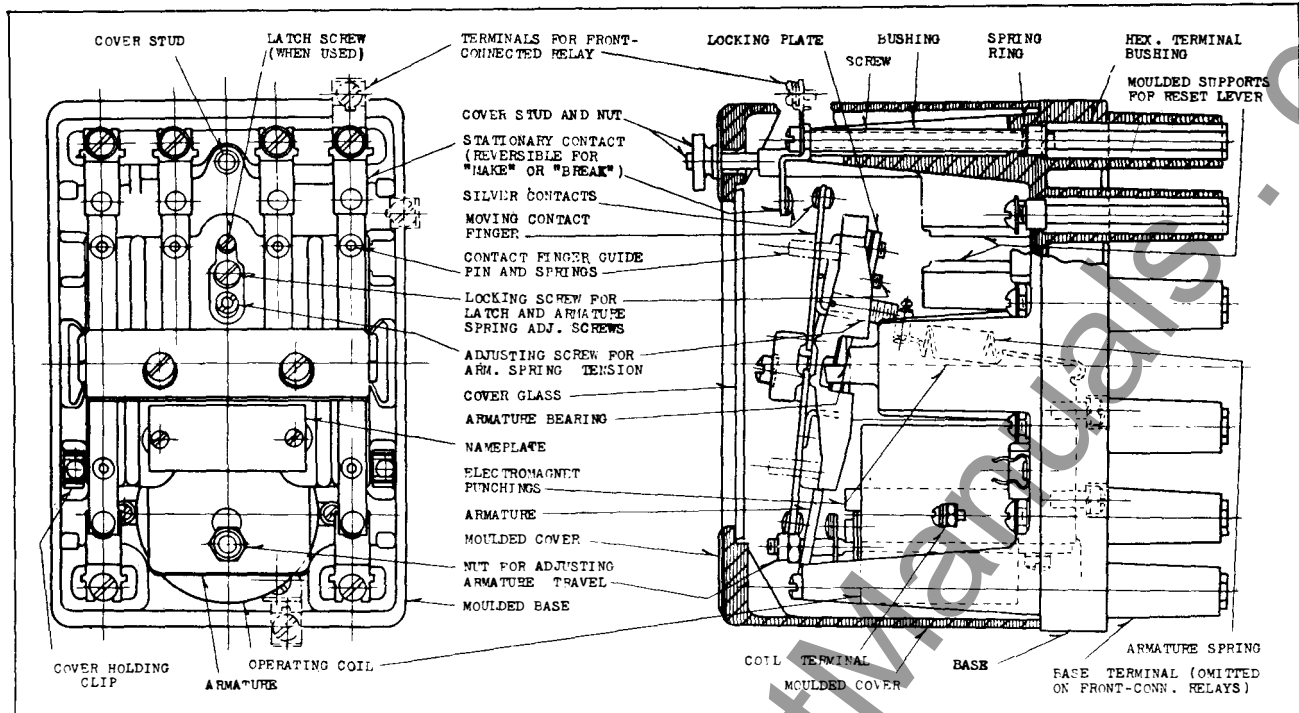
Front View (Cover Omitted) and Side View of the Type MG-6 Relay in the Molded Case, Without Latch or Reset.
